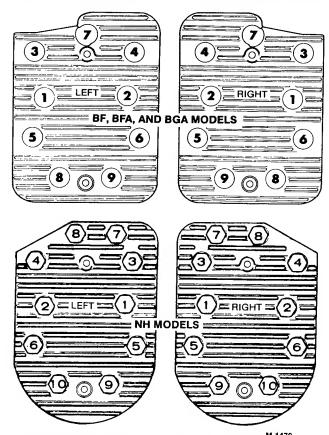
CYLINDER HEAD TIGHTENING SEQUENCE
